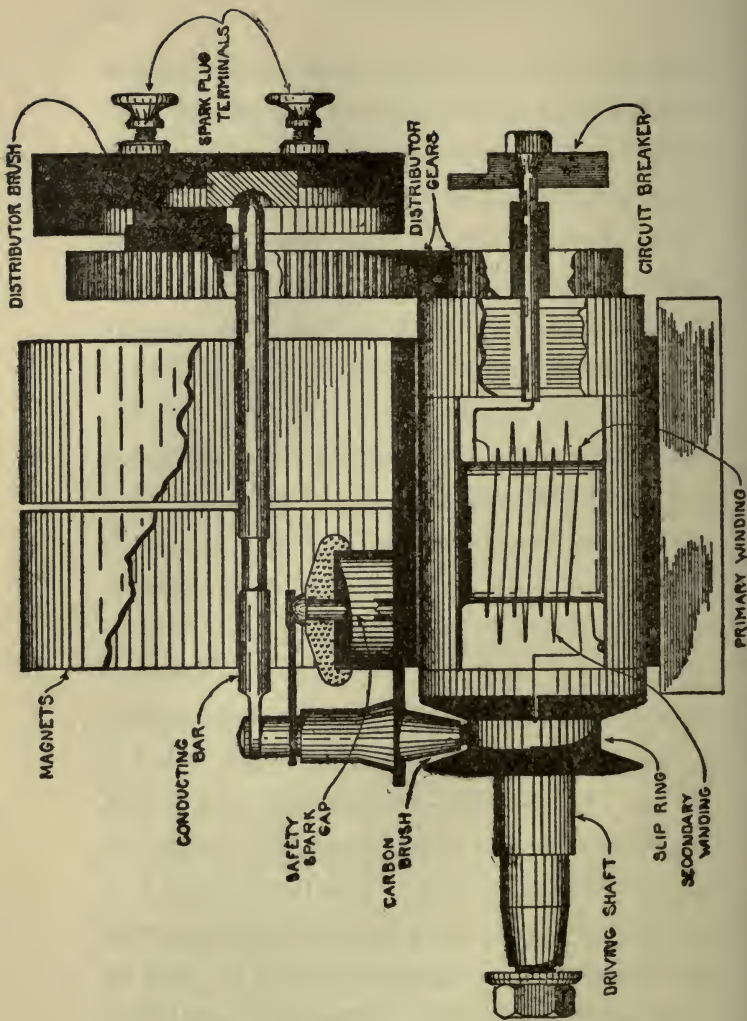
"BOSCH" MAGNETO IN SECTION
